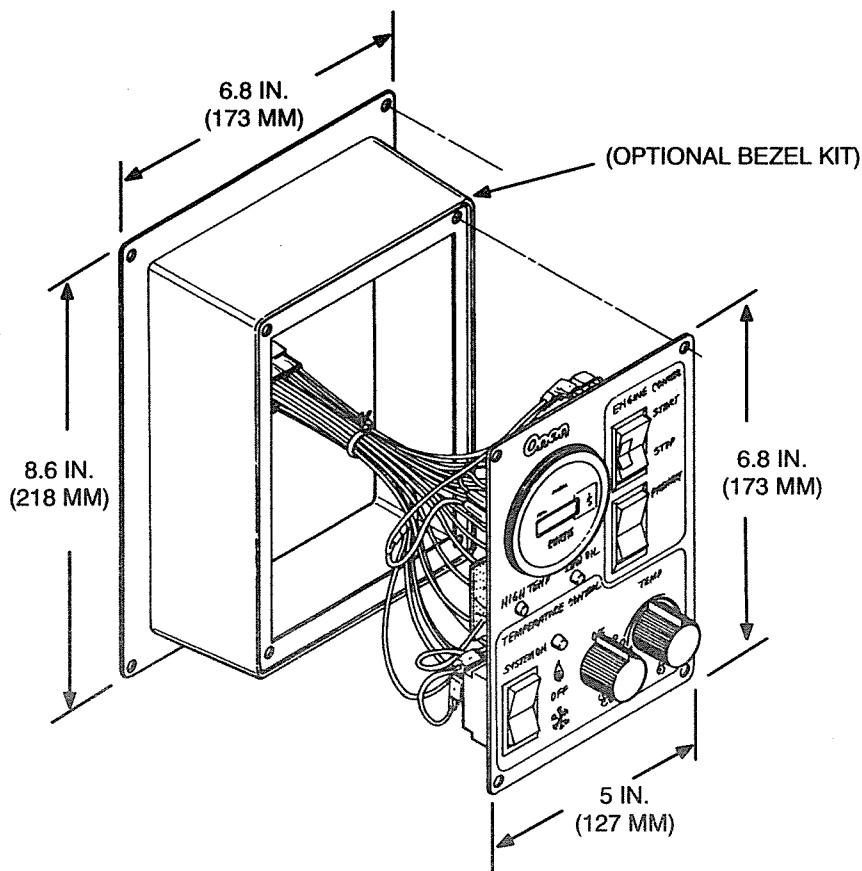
CONTROL PANEL AND BEZEL DIMENSIONS
